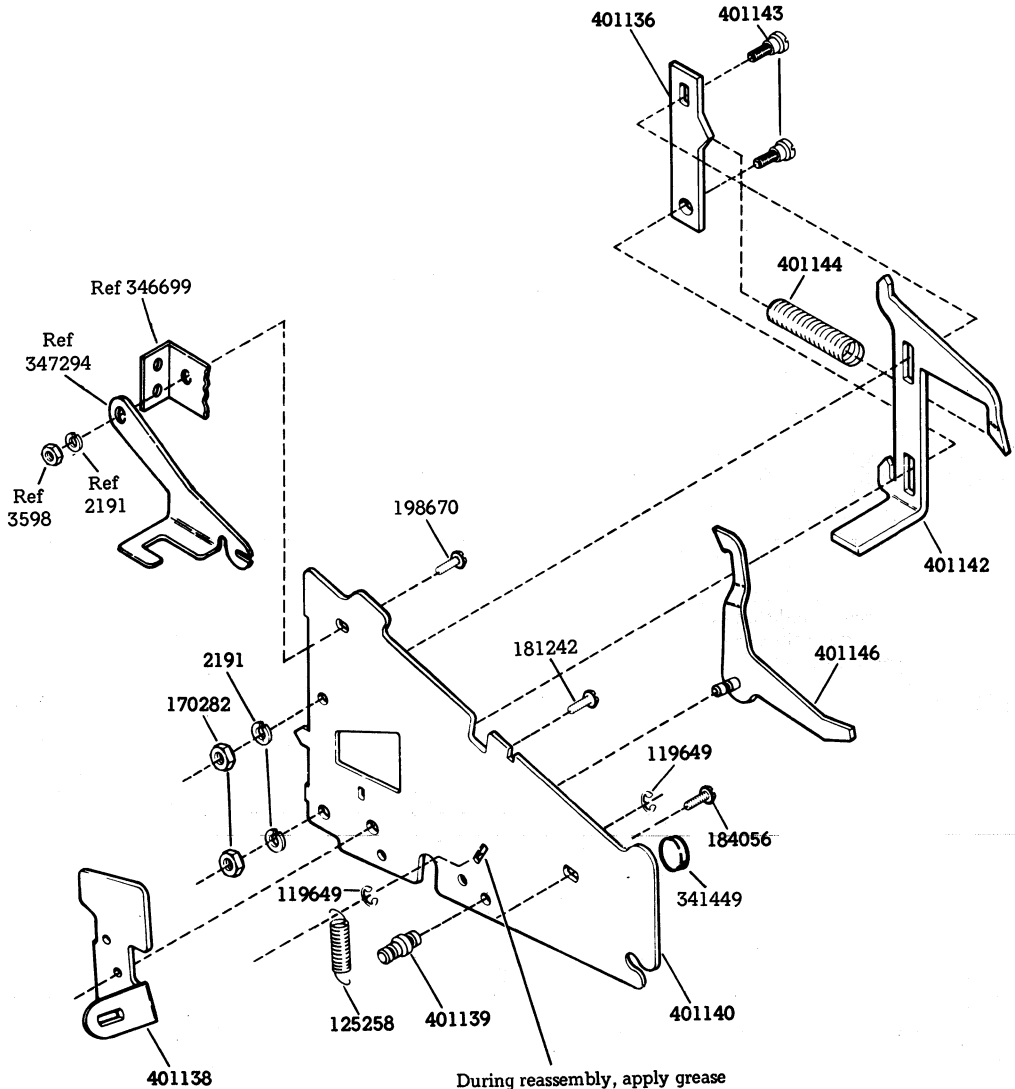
and 406990 Magnetic Stripe Reader Assemblies
